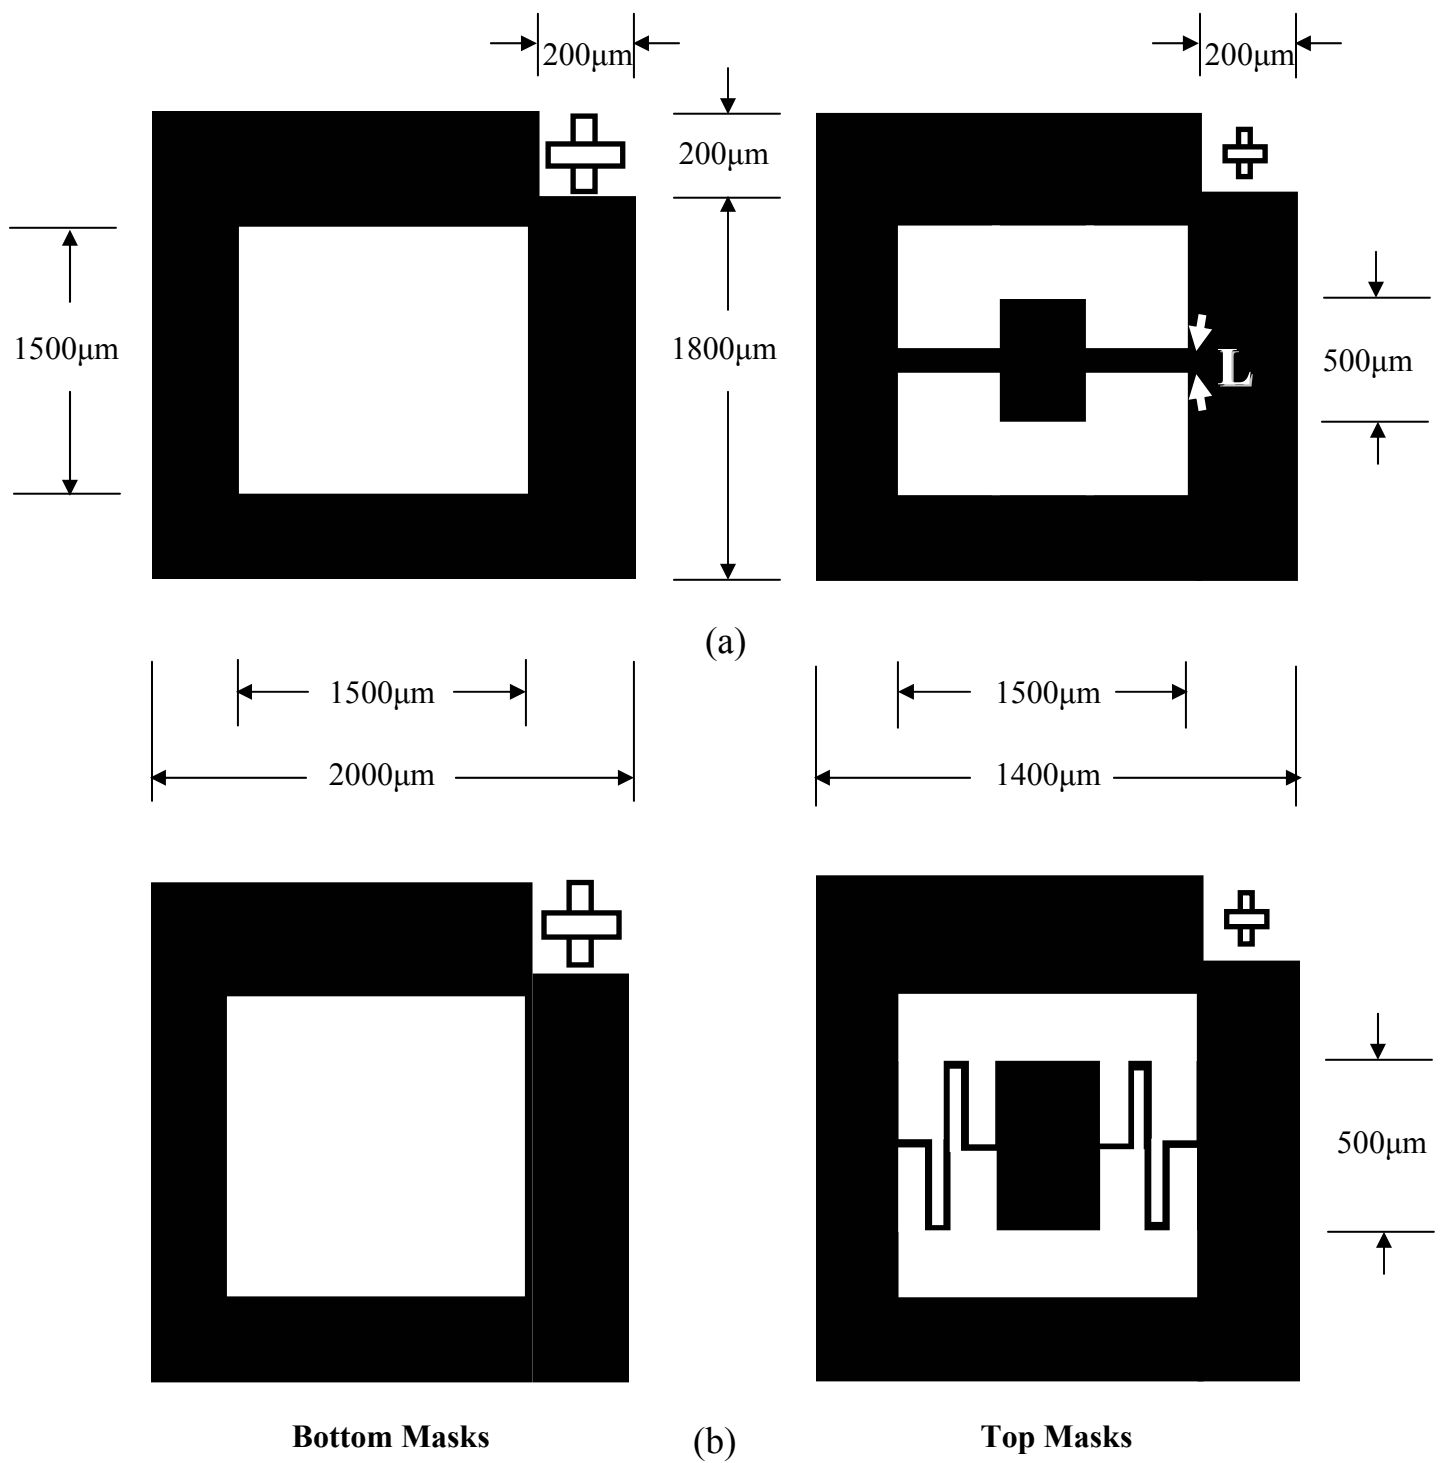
Drawings of the MM designs. (a) Single-axis MM, (b) Serpentine spring MM
